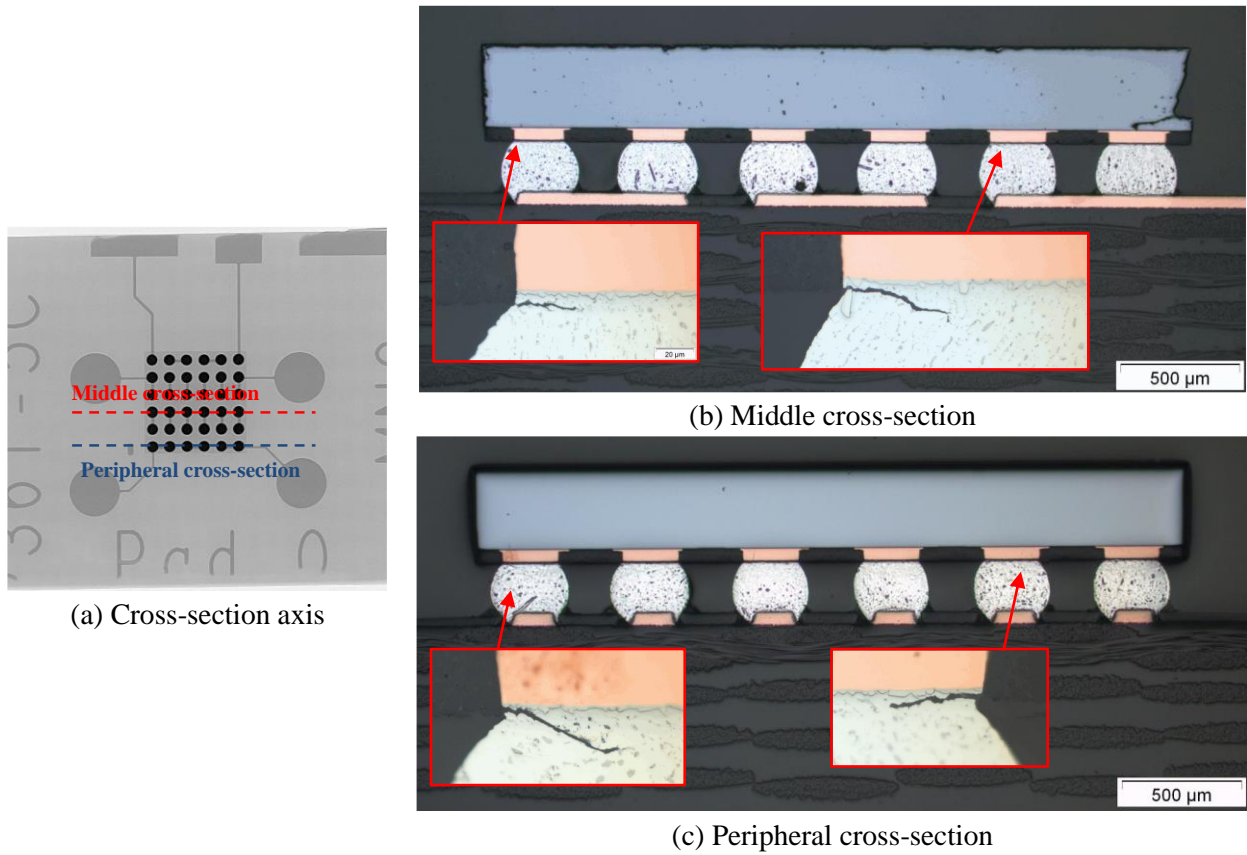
(a) Cross-sections performed after cyclic fatigue test before total solder ball fracture: crack initiations are visible on each solder ball of (b) middle and (c) peripheral axis
